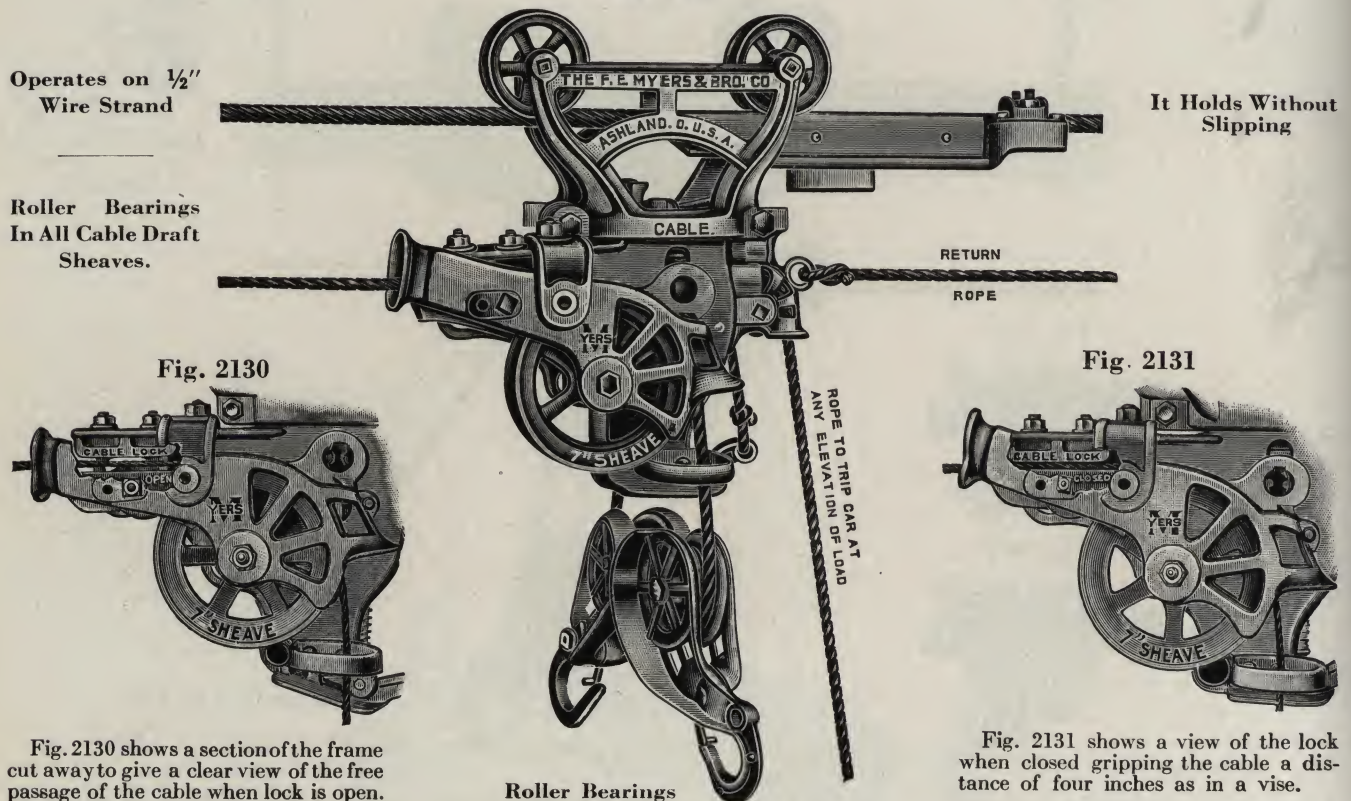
shows a section of the frame cut away to give a clear view of the free passage of the cable when lock is open.
